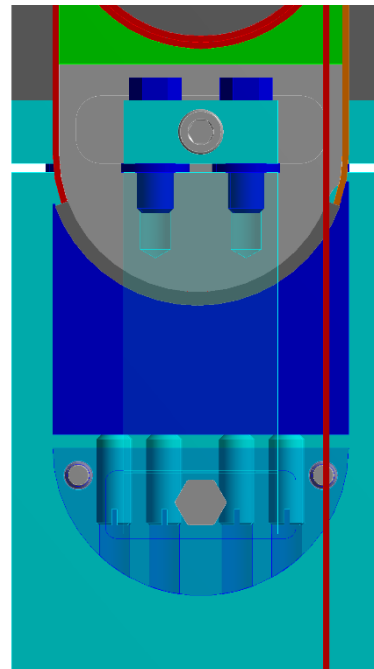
The pressing bolts are tightened and push the inner pressing plate.
